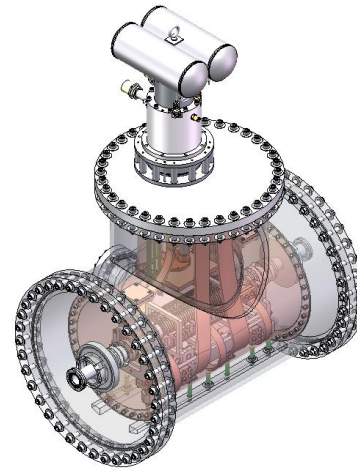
Advanced engineering design of the MgB₂ wire based undulator assembly.
